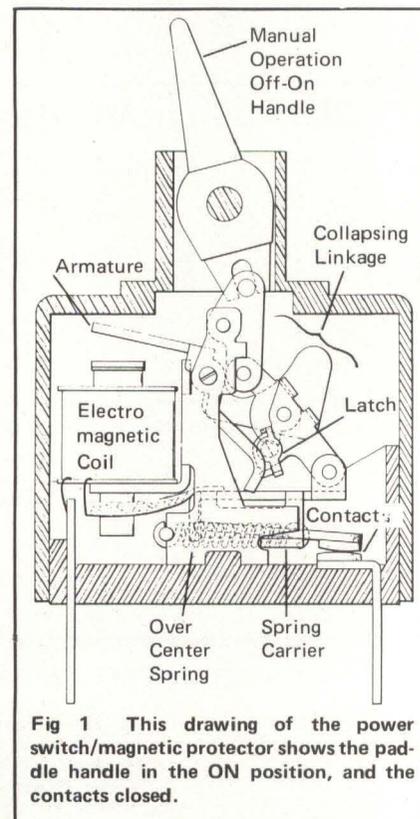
This drawing of the power switch/magnetic protector shows the paddle handle in the ON position, and the contacts closed.
